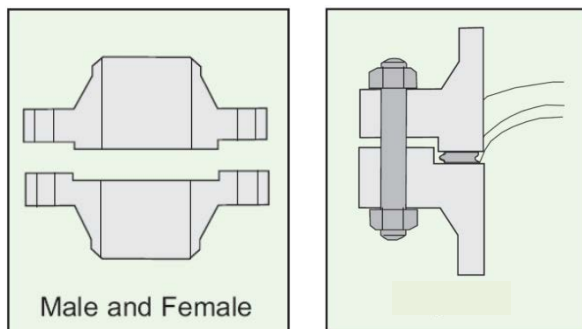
“Soft” joint male and female flanges with a windings-only spiral wound gasket [2]
